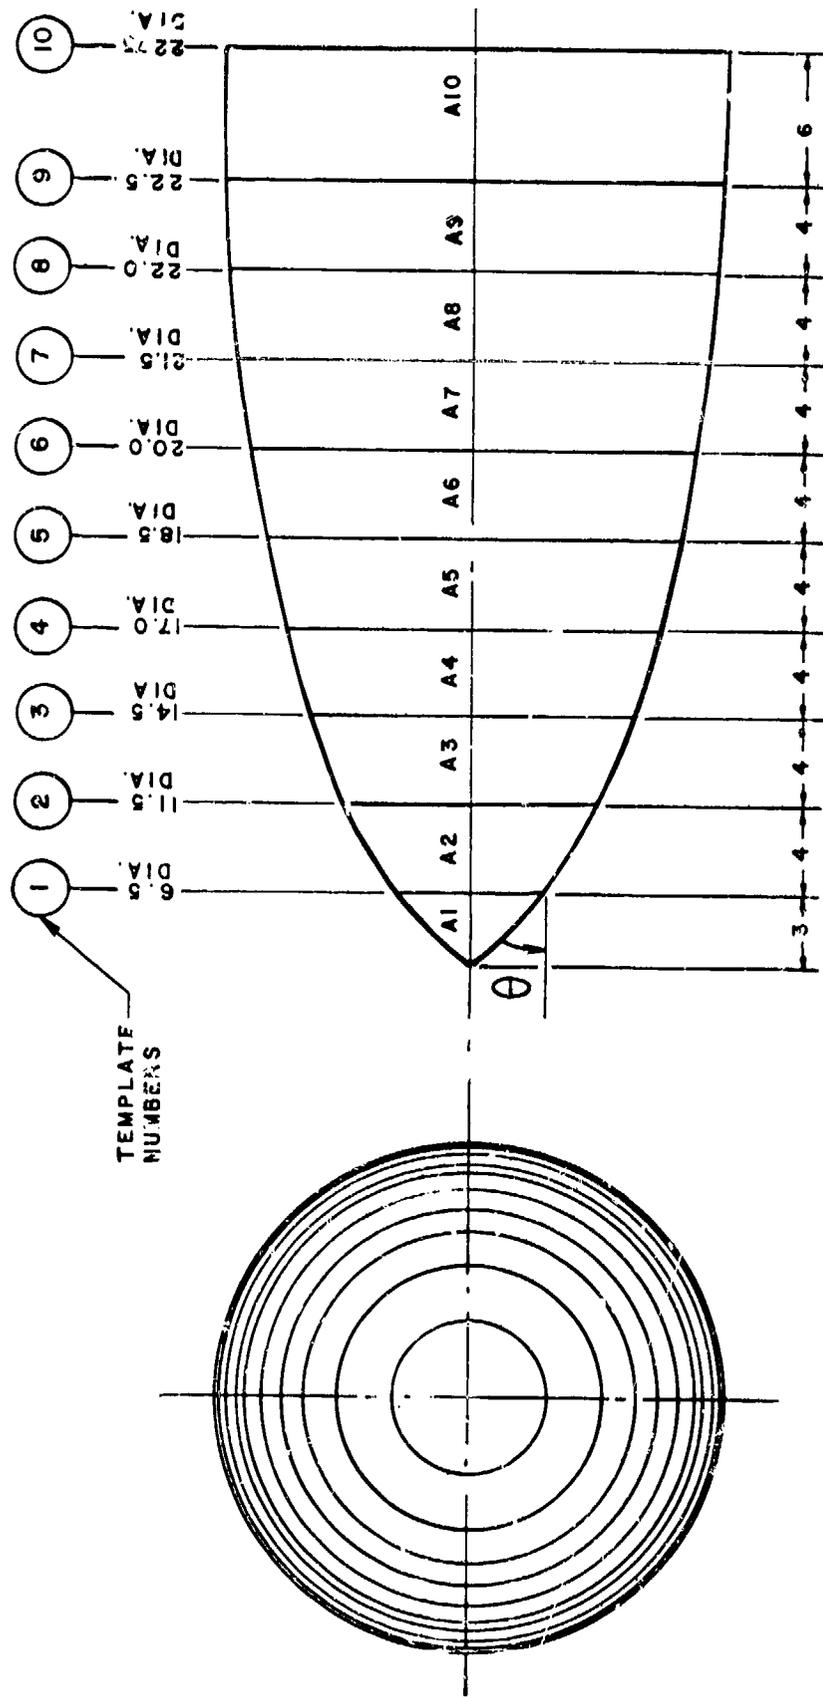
Explosafe Batt Assembly for Nose Cone
